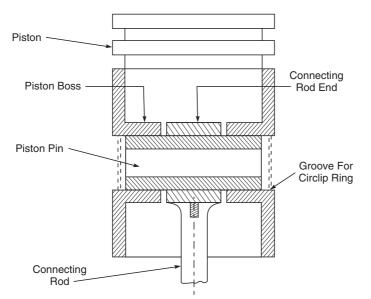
Assembly of Piston and Connecting Rod by a Piston Pin
